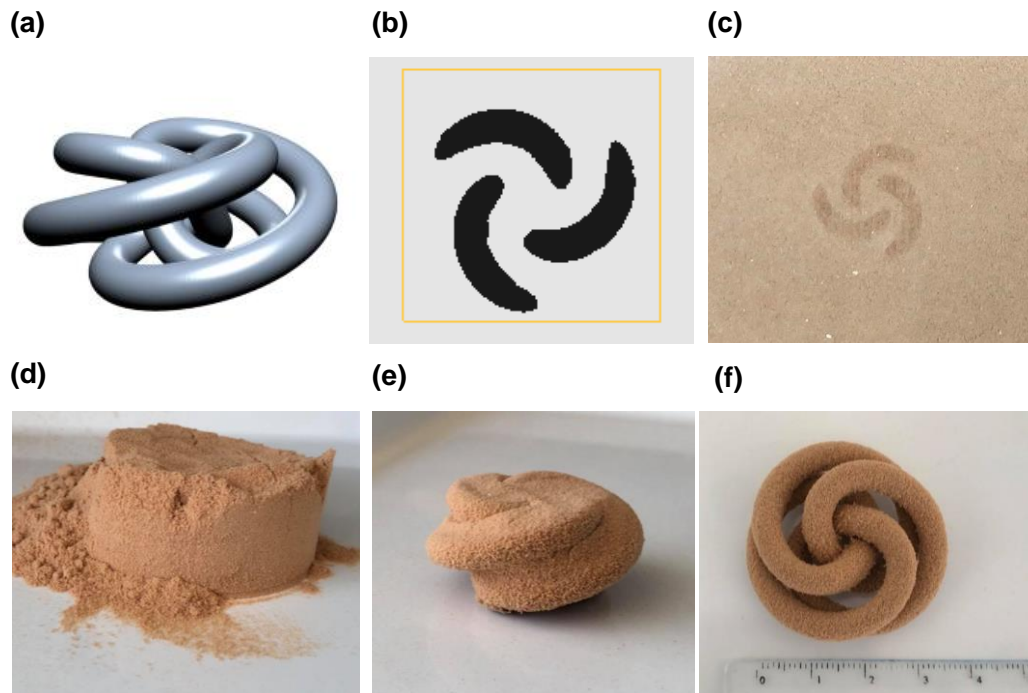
Images of the 3DP process from (a) 3D model; (b) example of a layer; (c) example of a layer during printing; (d) part removed to powder bed; (e) during dedusting; to a (f) final 3DP cork part.
